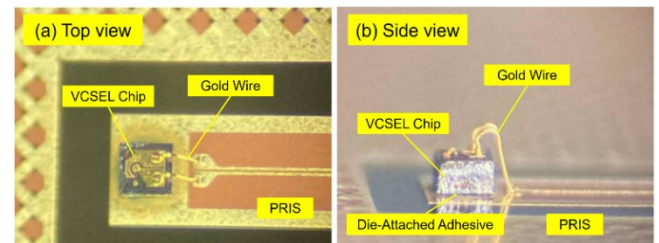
OM image of the PRIS with VCSEL chip after assembly.
